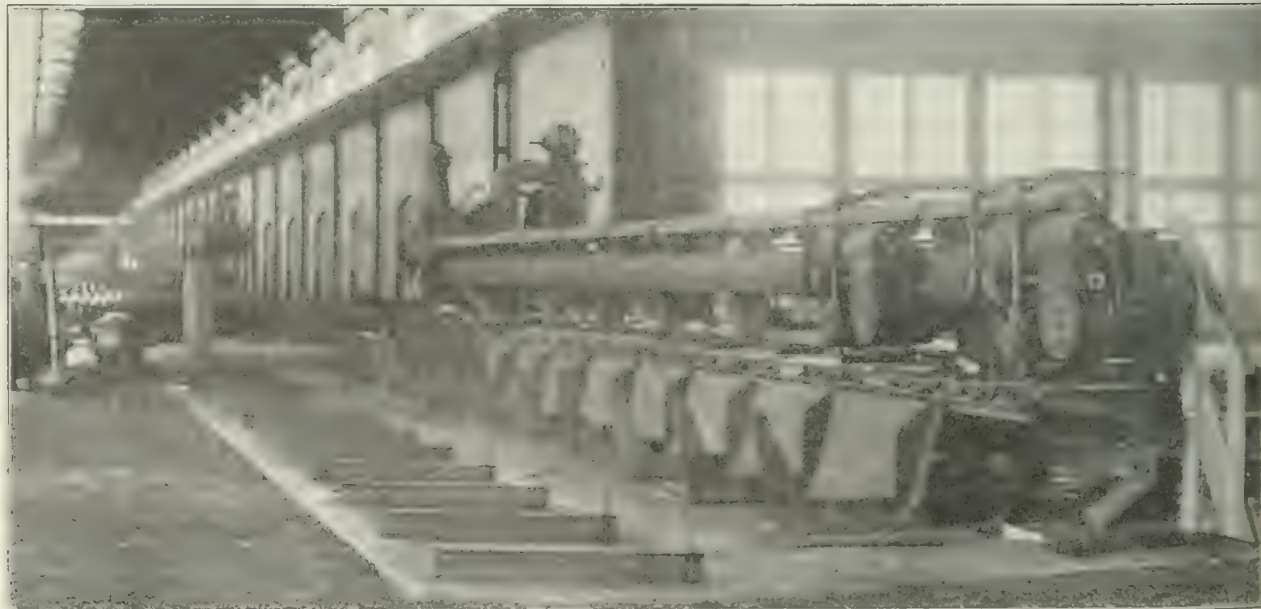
Cutting-off Machine in 10-In. Mill.
